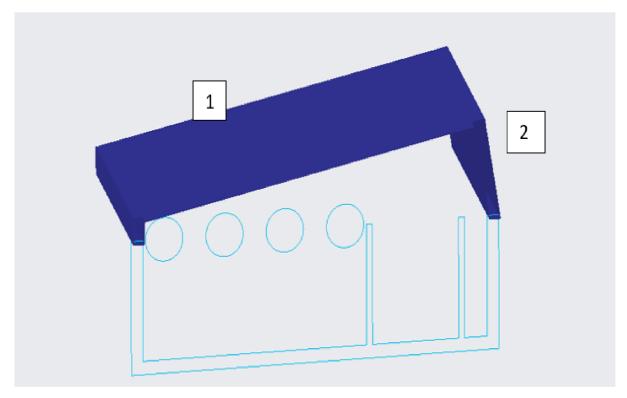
Machine Construction slope view 1.First Chamber 2. Collecting Chamber
